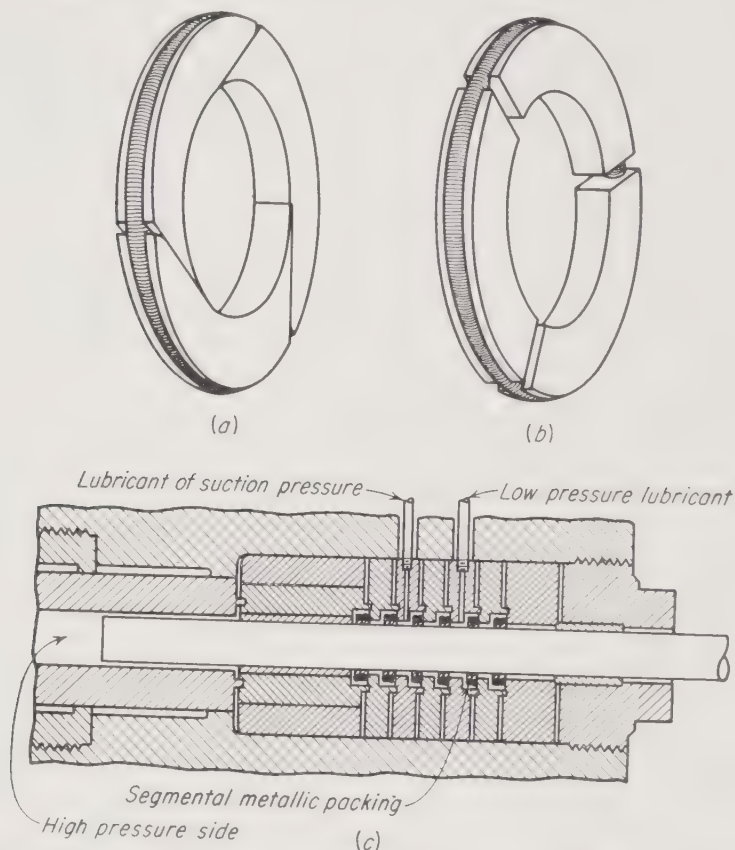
Metal packing. [From Walter Coopey, *Chem. Eng.*, 58(7):116 and 58(11):164 (1951).] (a) Metal packing ring segmented tangentially. (b) Ring with radial cut. (c) Packing case for metal rings.
